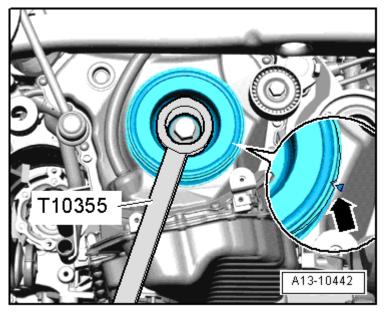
Identifying Vibration Damper Rotated Into "OT" Position Using Counter Hold Tool T10355 Courtesy of VOLKSWAGEN UNITED STATES, INC.
